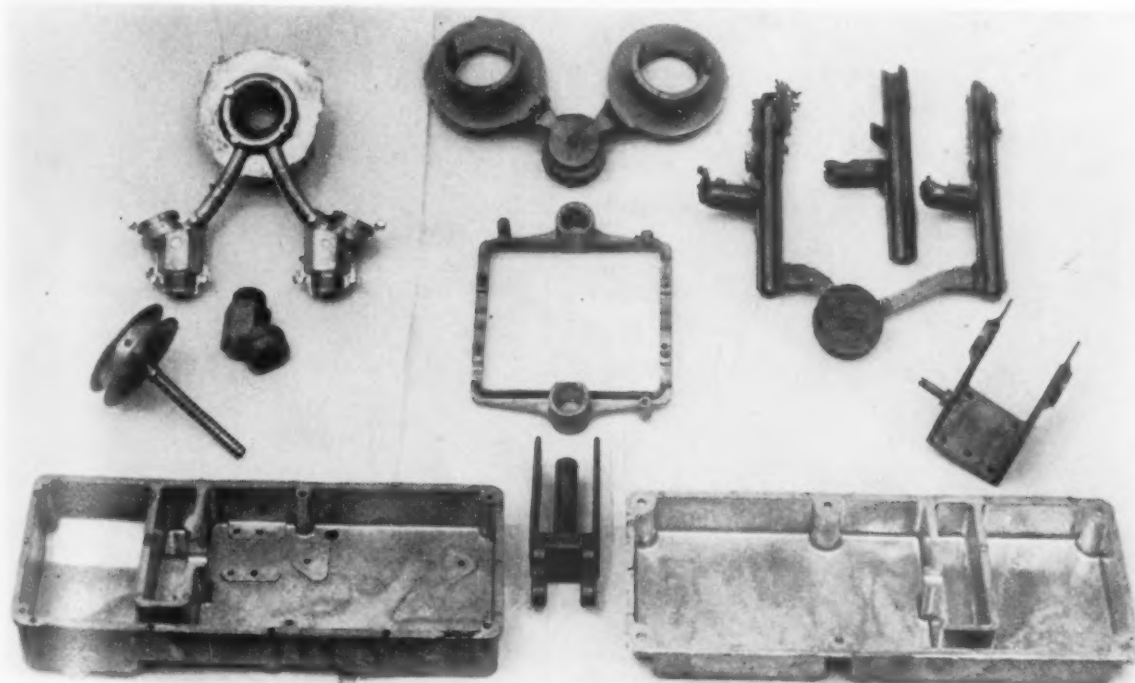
Typical diecastings produced in zinc, brass and aluminum for Harnischfeger products.
